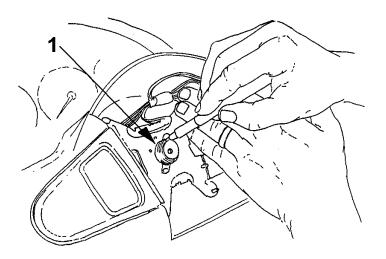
Arrow Indicates Location to Mark Shaft and Spindle
